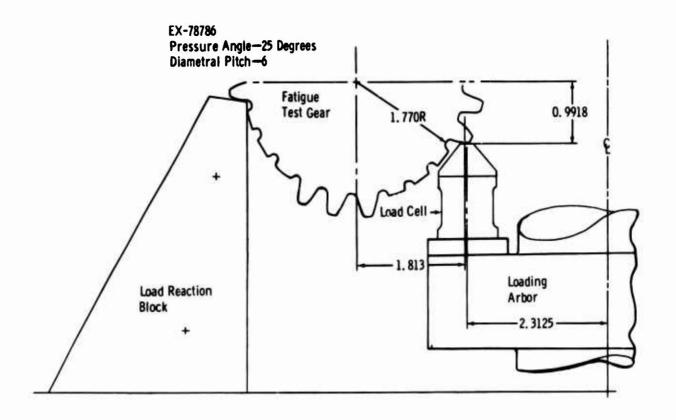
Typical Dimensions of 6-Pitch Gear Test Setup.
